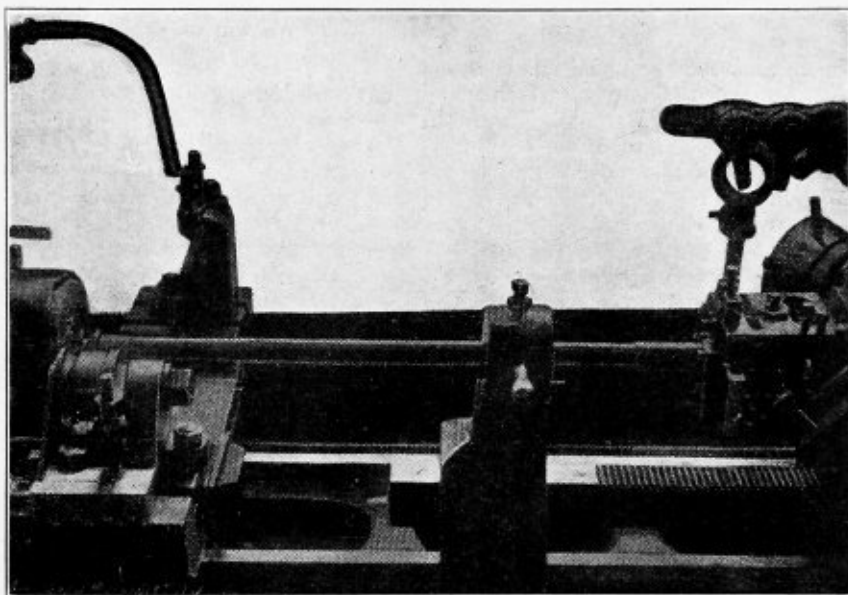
FINISHING A LONG STAY-BOLT IN A PRATT & WHITNEY OPEN-TURRET LATHE.
